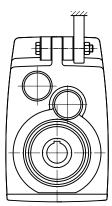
Mounting the rubber buffer (Option G and/or VG) on parallel shaft gear units
